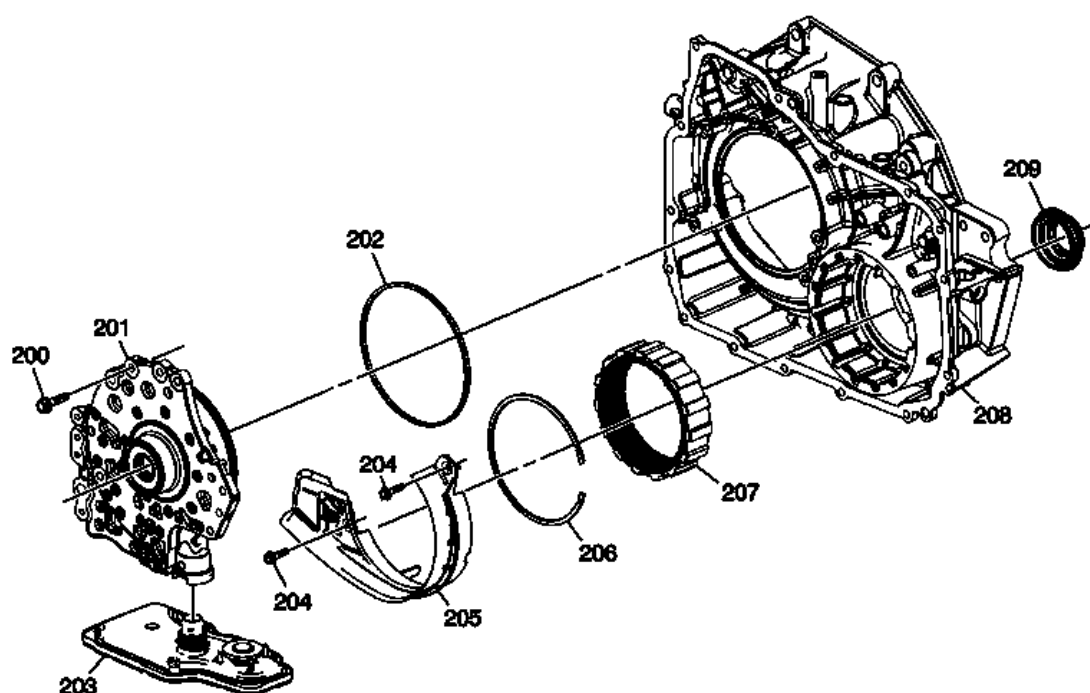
Torque Converter and Fluid Pump Housing Assembly Components -- 6T40/6T45/6T50 -- Gen 2
